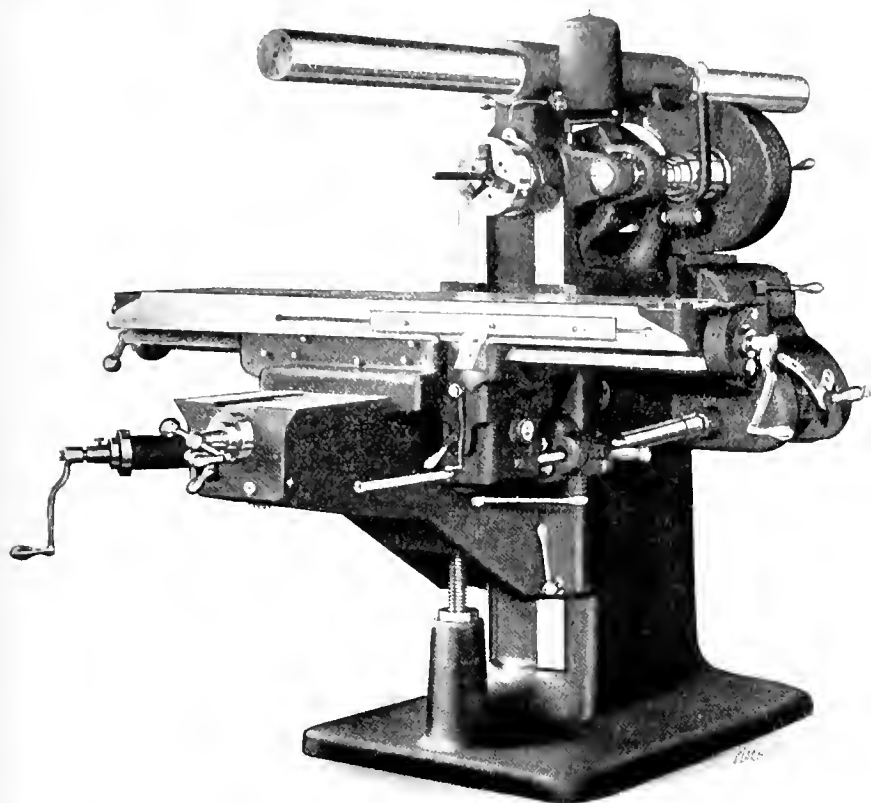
Miller provided with Vernier Gages and other Conveniences for Jig Boring
